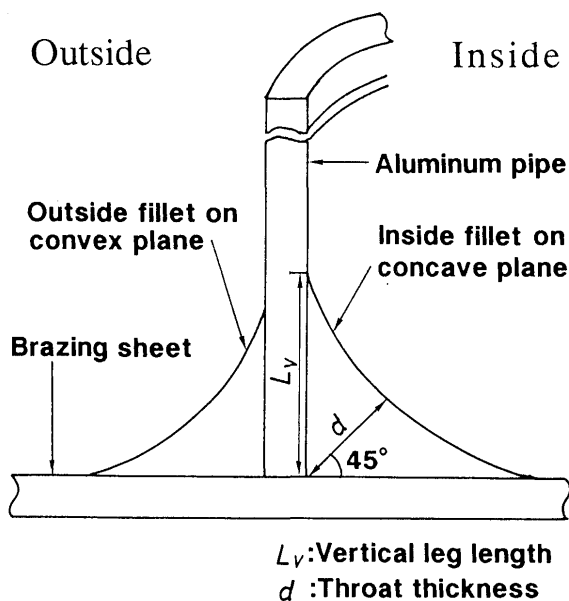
Fillet on inside (concave) plane and outside (convex) plane formed on an aluminum pipe.
